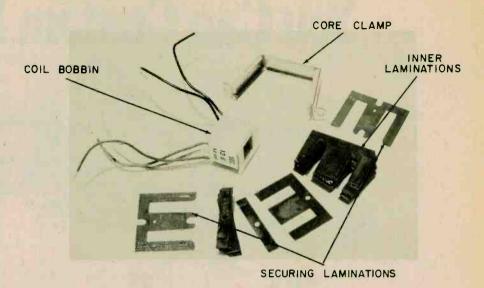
Transformer is completely disassembled here. The coil assembly has been removed and is ready to be rewound. Be sure to make a diagram of the relative position of the laminations so they can be fitted back together again. Failure to do so will result in having extra pieces left over!
